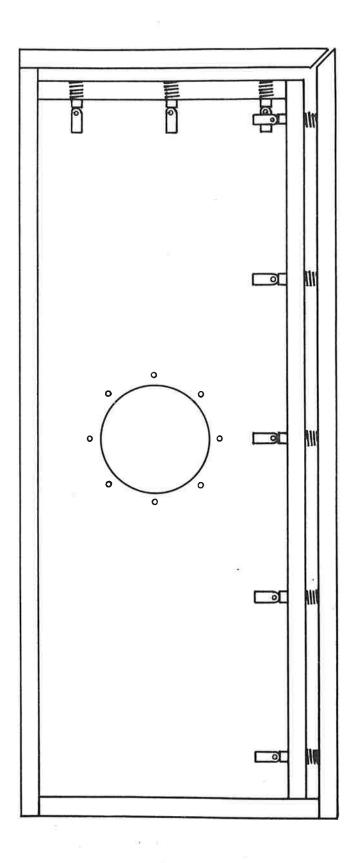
Adjustable door panel with spring-loaded top and side pieces.
